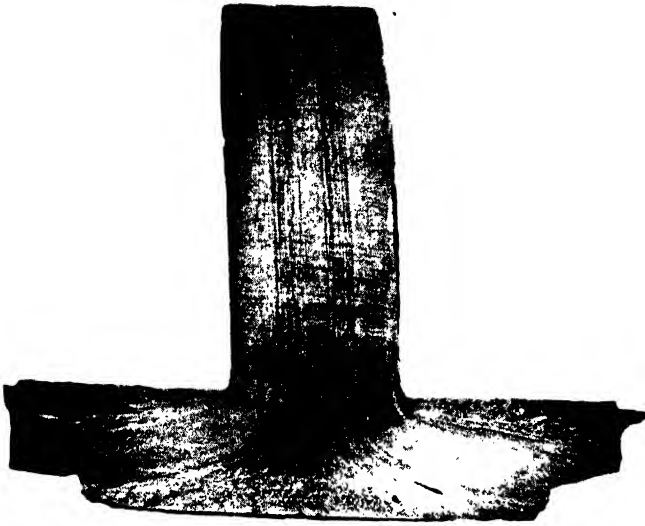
Extrusion defect entering at back end of an extruded bar.
